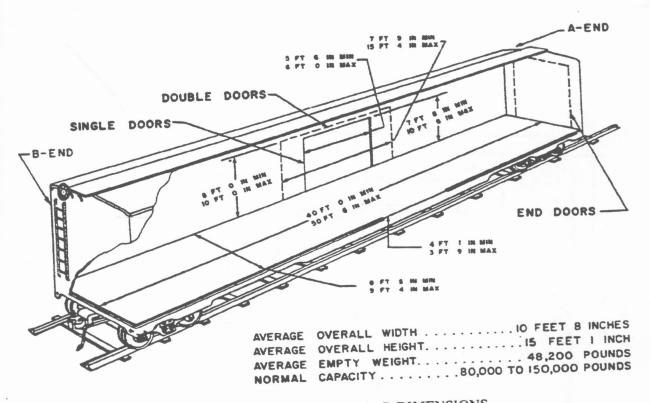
TYPICAL BOXCAR DIMENSIONS
